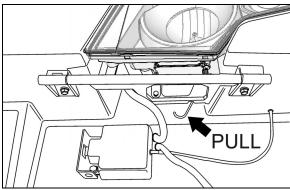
ROCKING THE HEADLIGHT ASSEMBLY 06714
